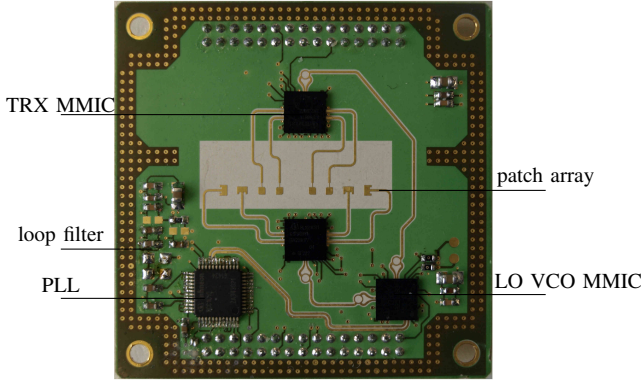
Assembled radar frontend PCB (based on Rogers 3003 substrate)
